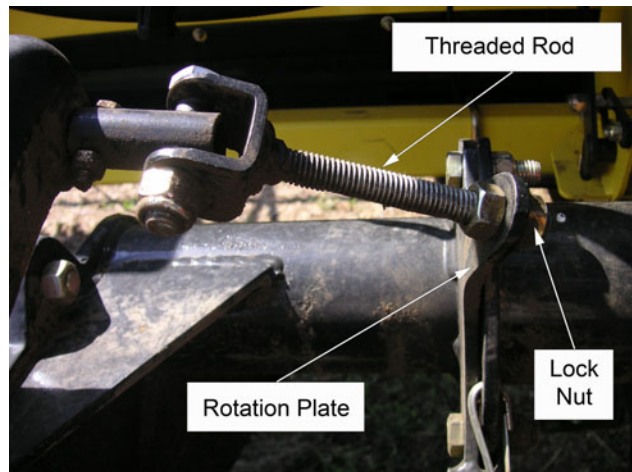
Linear Actuator - Threaded Rod Adjustment
